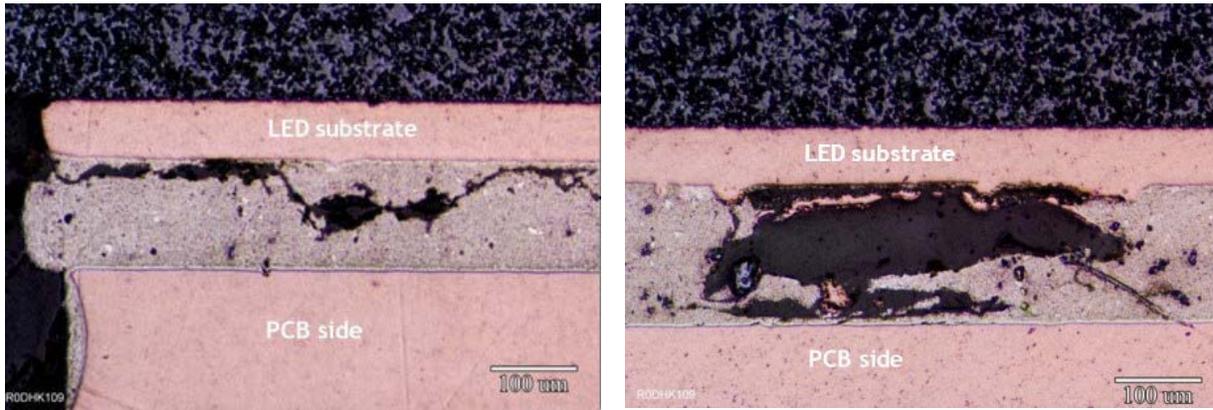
Cross-sections of failed solder joints imaged by an optical microscope, showing large voids and cracking along the plane of the joint
